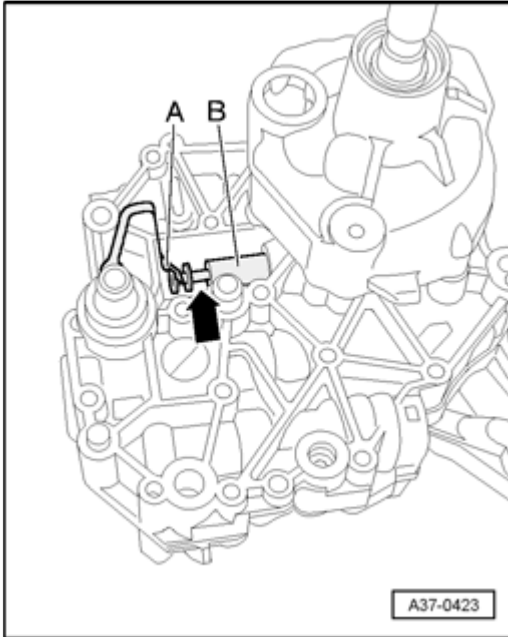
Pressing Control Piston On Rear Side Of Hydraulic Control Module Completely Inward Until It Engages Into Assembly Spring
